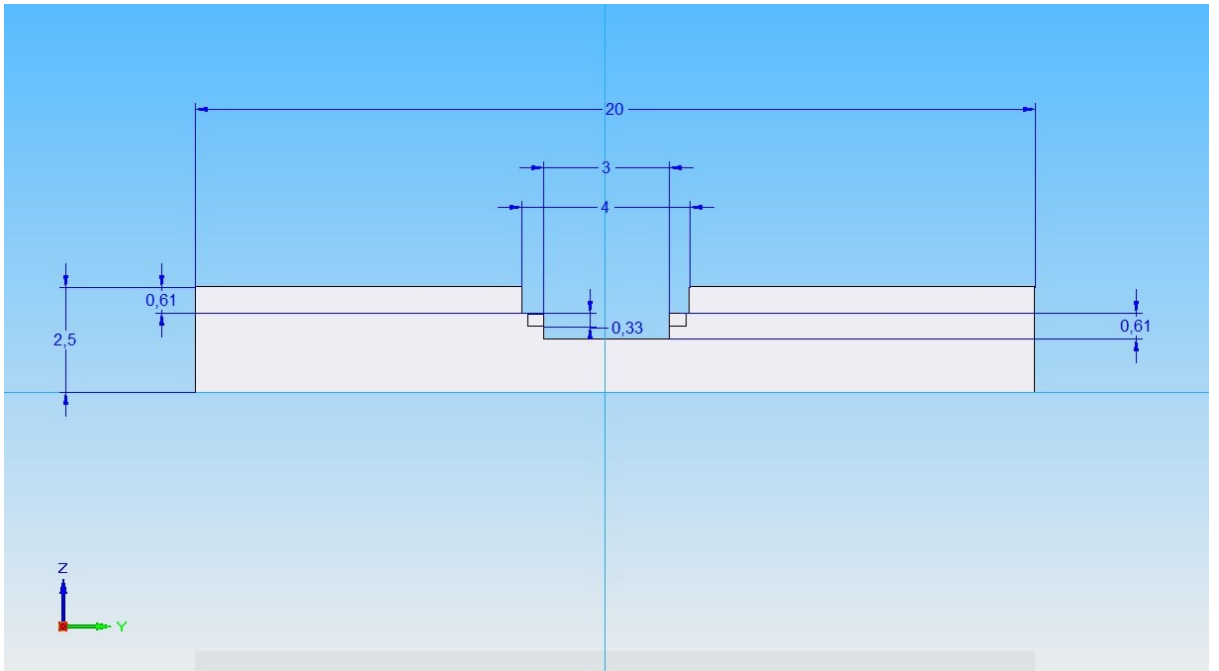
1 Front view of waveguide sensor carrier (Part 1)
